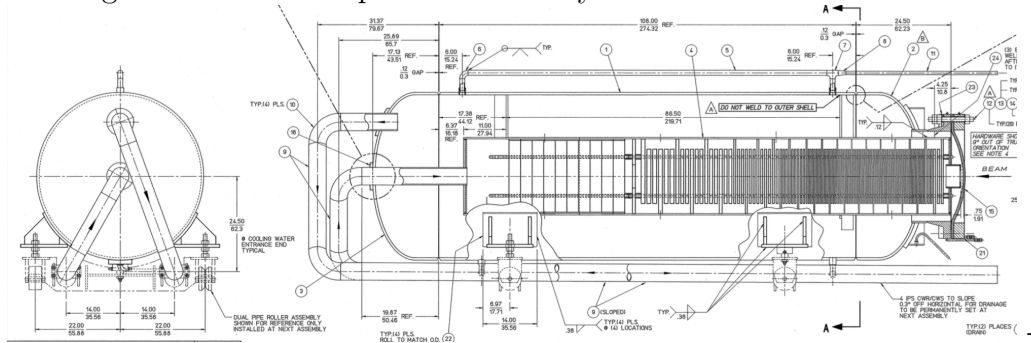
Plate exchanger assembly - DWG. NO. 27020-E-0016
